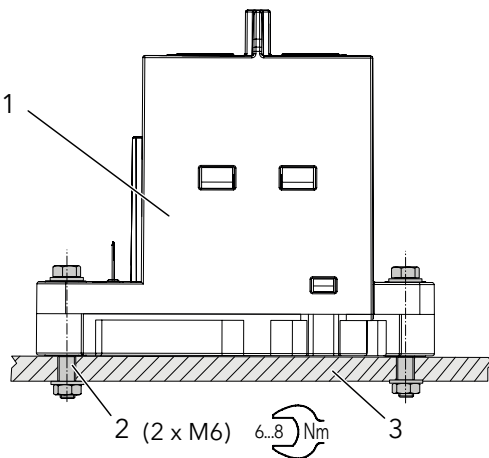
C303-XXX-G0F-...: Installing the contactor on the mounting plate
